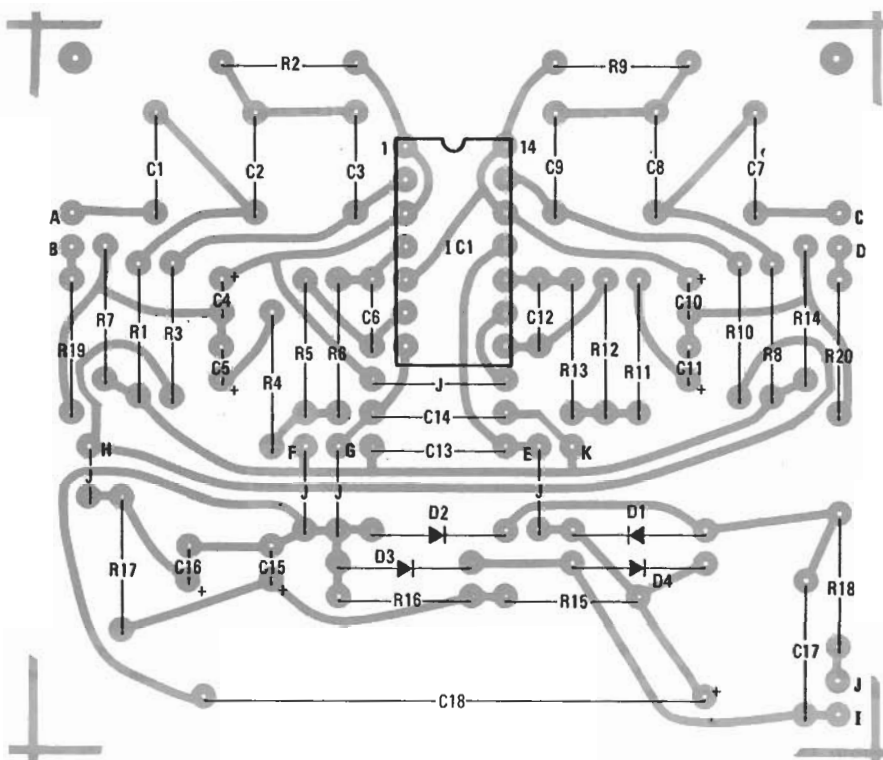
ALL PARTS except the wall-plug transformer, switches, and jacks are mounted on the PC board as shown.
